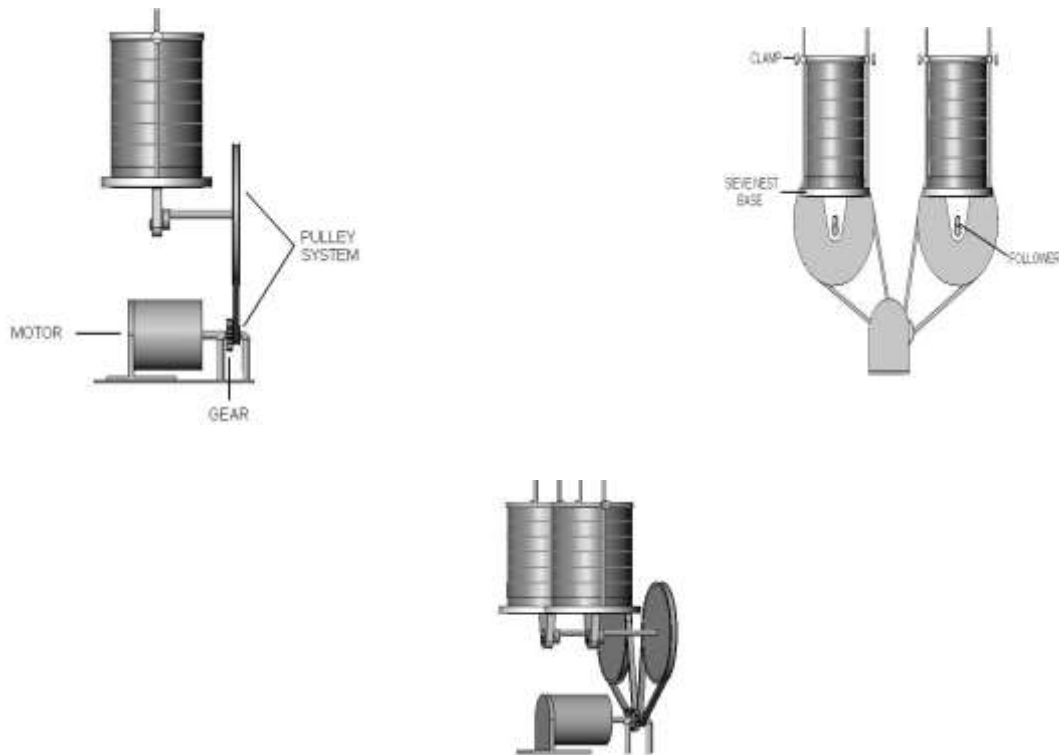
Design sketches of the constructed mechanical sieve shaker
